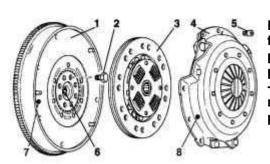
Clutch Components: 1 - Handwheel, 2 - attachment bolt flywheel, 3 - slave drive, 4 - pressure plate, 5 - bolt mounting pressure plate, 6 - bearing clutch, 7 - marking combination flywheel, 8 - marking combination of pressure plate
